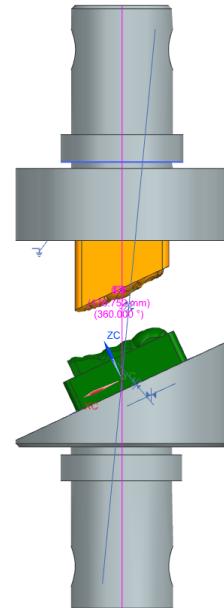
Alignment of maxillary and mandibular adaptor assembly
